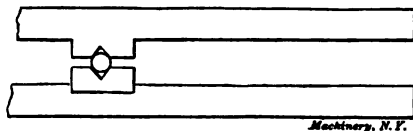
Part of Jig with Pivoted Leaf, Showing Method of Holding Round Work
